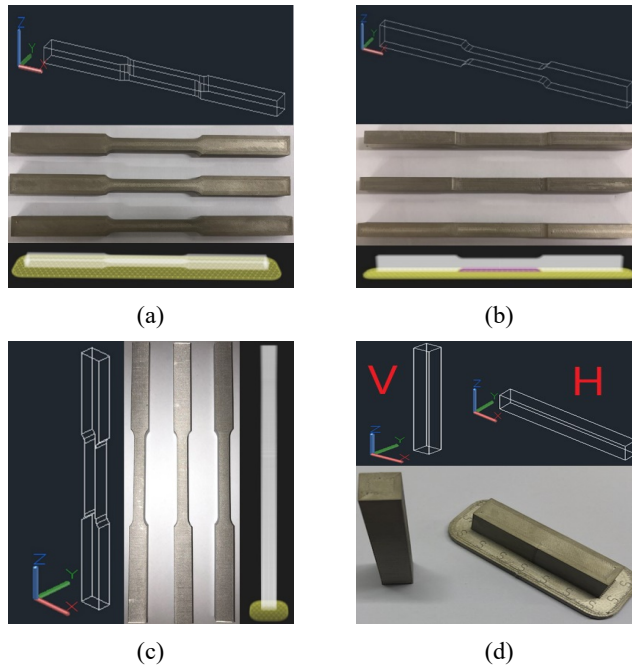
Printed specimens, (a) XY-flat, (b) XY-sided, (c) ZX, (d) vertical and horizontal print
